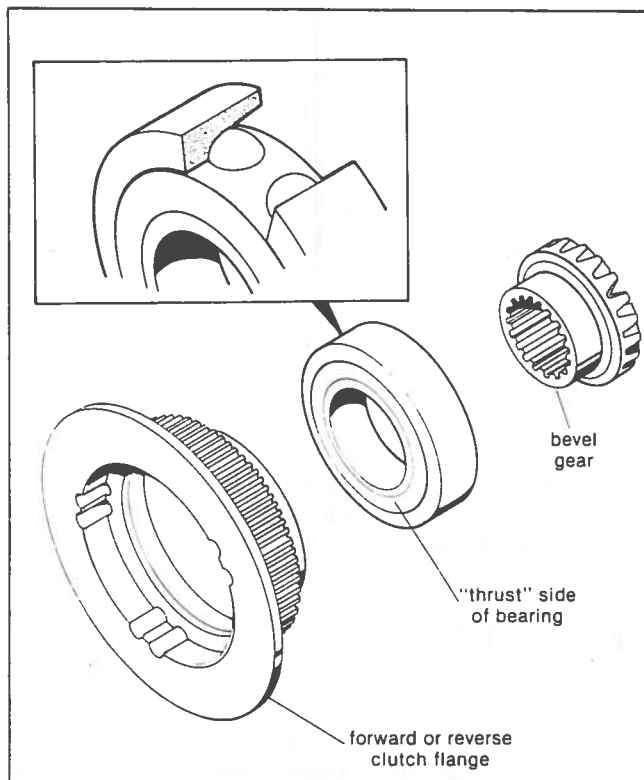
Clutch end flange, bearing and bevel gear. Bearing must be installed so that "thrust" side of bearing is toward clutch flange.
